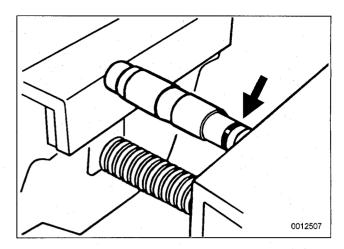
When reinstalling chain tensioner, oil in tensioner piston must first be expelled by compressing piston in vise. When compressing piston, only compress up to end circlip (arrow).
